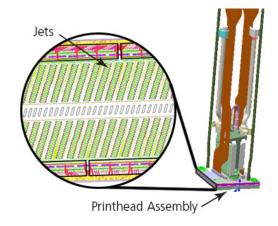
Magnification of jets on the wafer and their location in the printhead assembly.
